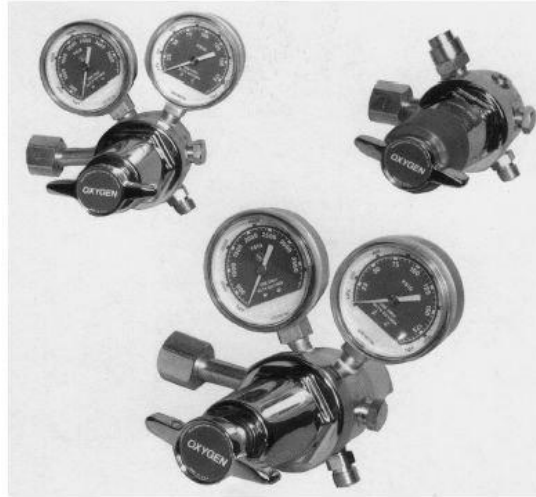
Three regulators for use on oxygen cylinders: one-stage with gauges (upper left), gaugeless (upper right) and two-stage (lower).
